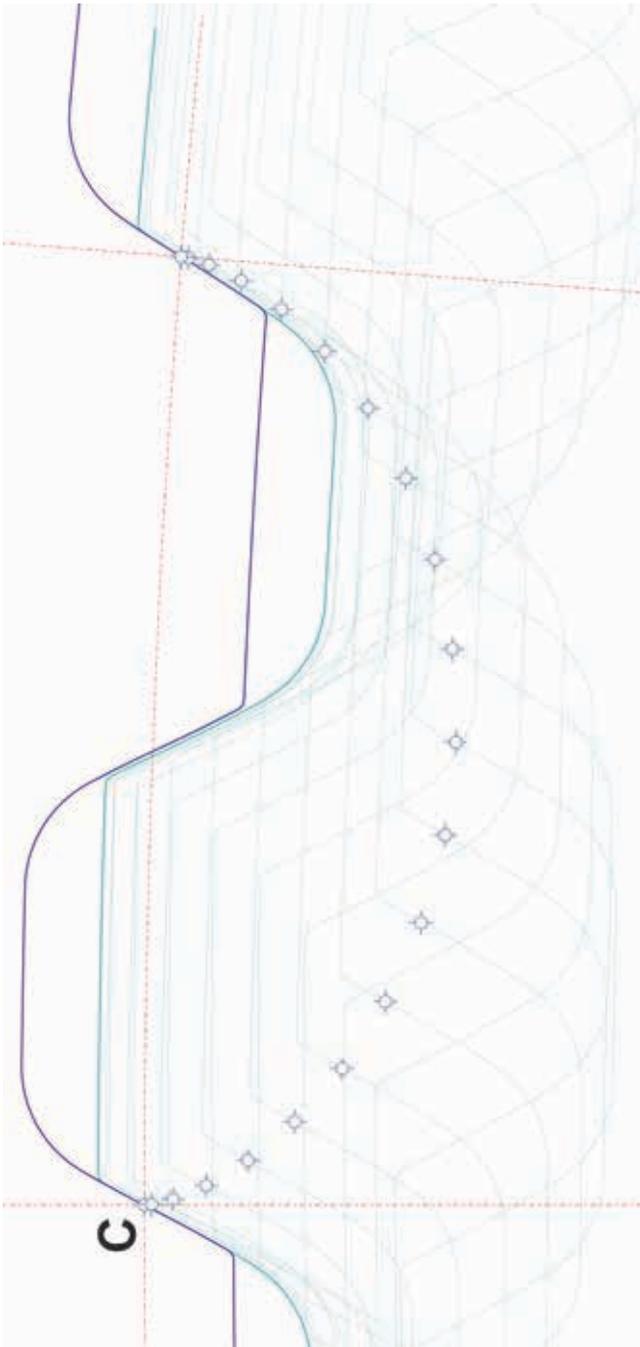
Planetary gear movement in accordance with hypocycloid generated on the kinematic circle of the ring gear [8].
